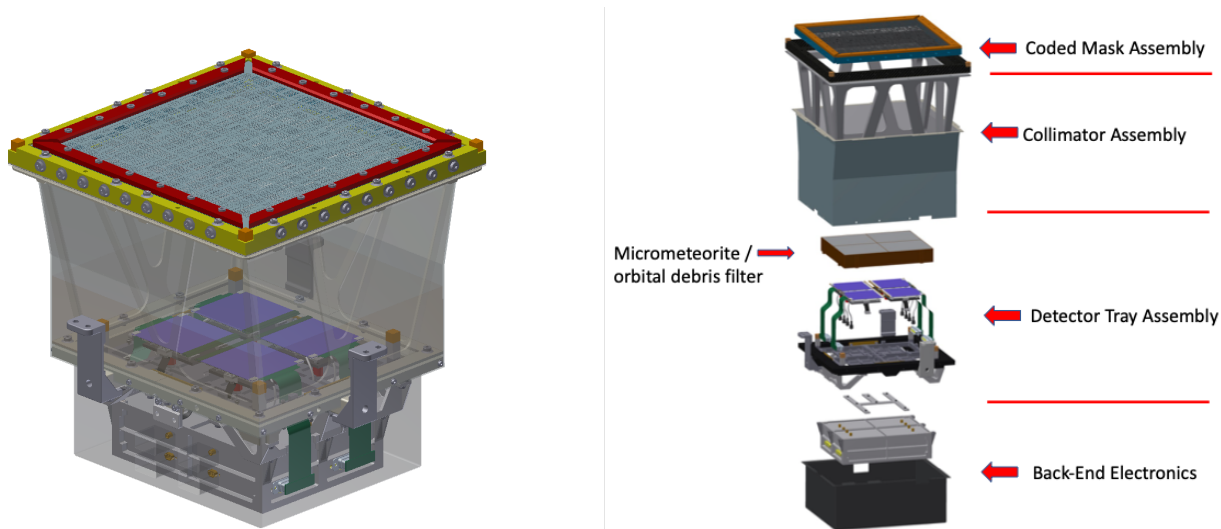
WFM camera mechanical design. Left panel: WFM camera layout, where the coded mask assembly, the collimator and its shielding (transparent), the detector plane with its four detector assemblies and the BEE box are shown. Right panel: Schematic exploded view of a WFM camera.
